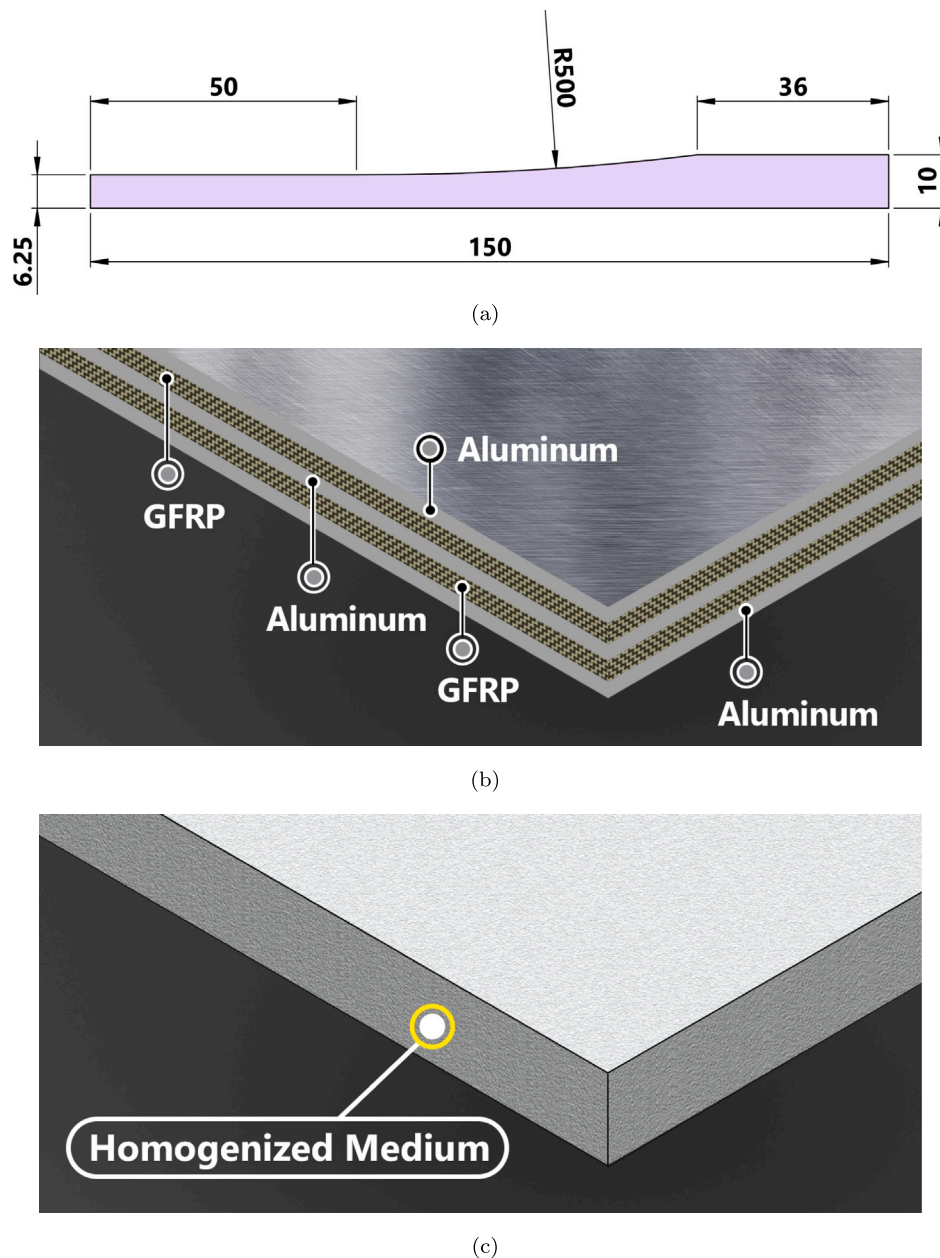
(a) Schematic view of the standard tensile test specimen, (b) Considered GLARE structure in SP-RoM, and (c) GLARE structure in classical mixing theory (dimensions in millimeters).
